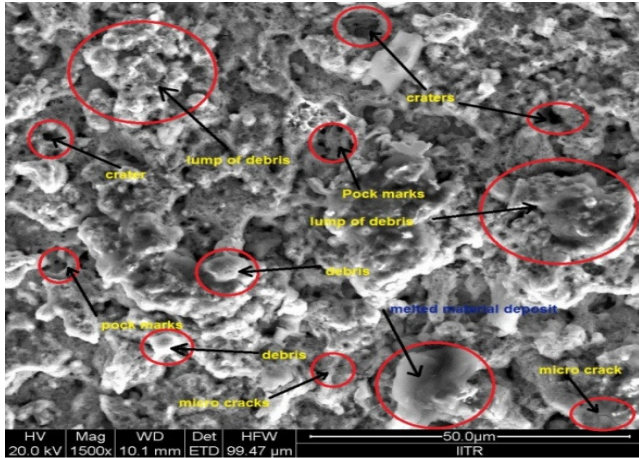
Fe-SEM of machined surface of WC-24%Co composite material (For 2nd sample)
